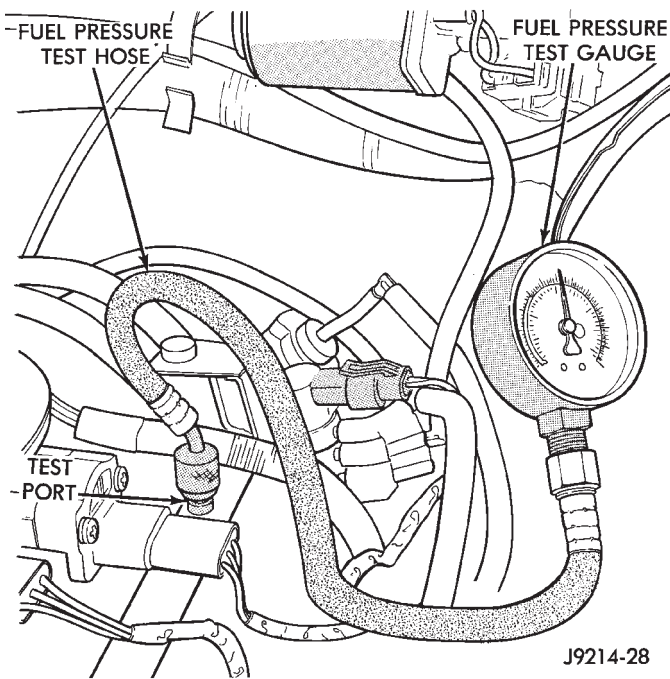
Fuel Pressure Test Connection—5.2L Engine checks OK and fuel pressure does not rise approximately 8-10 psi after disconnecting vacuum line, replace fuel pressure regulator.
